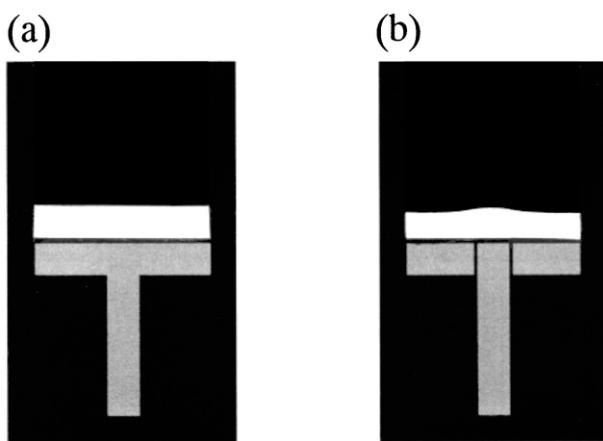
Cake growth patterns in slip casting using T-shaped gypsum molds having a single part (a) and three parts (b) for a period of 3600 s.
